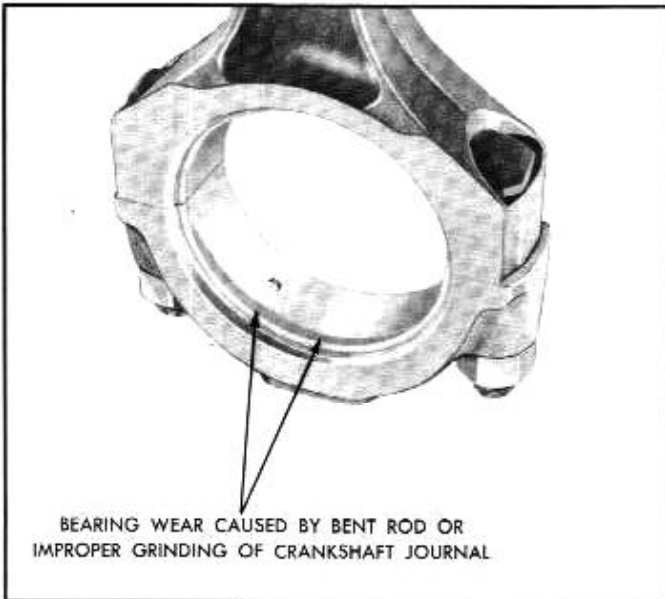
A-62—Wear Pattern On Connecting Rod Bearing
